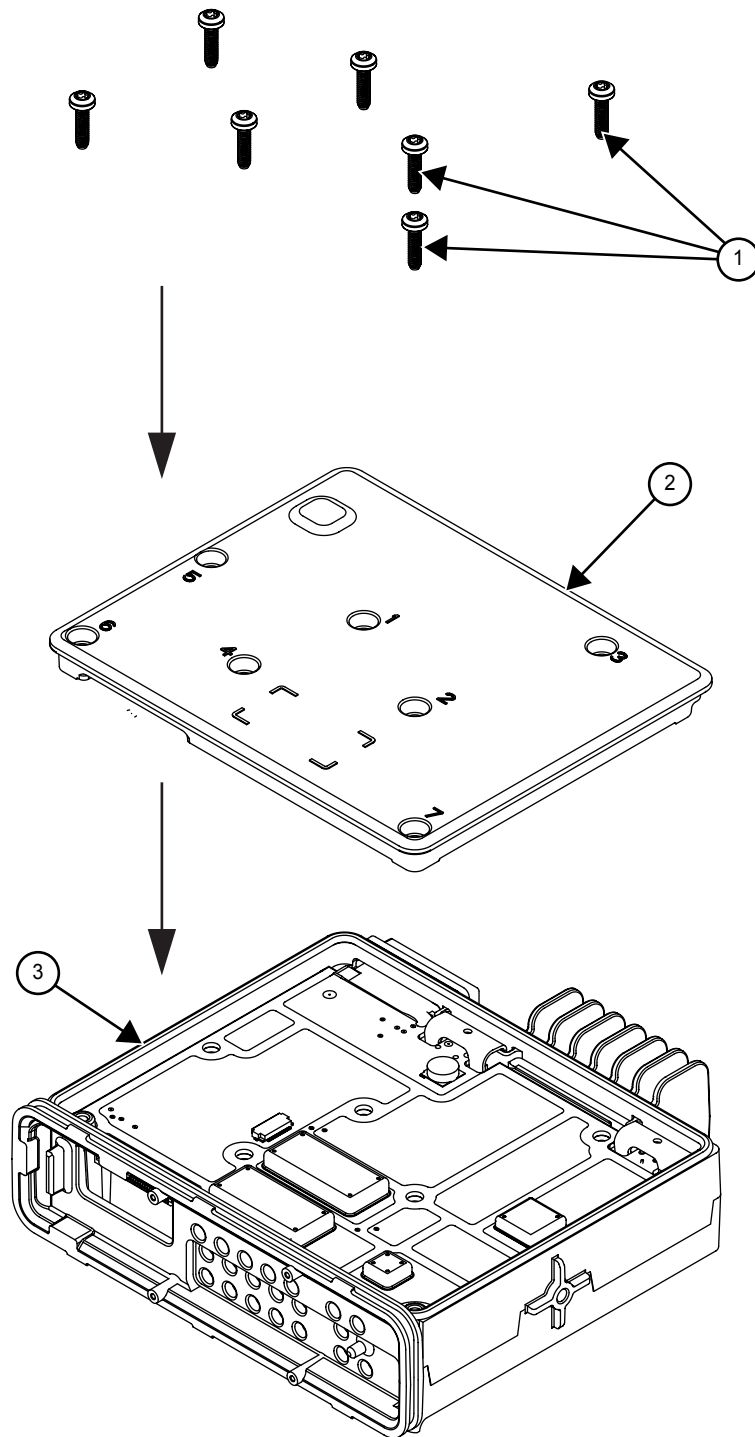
Assembling of PA Pad and O-ring (VHF 8 MB Brick)
